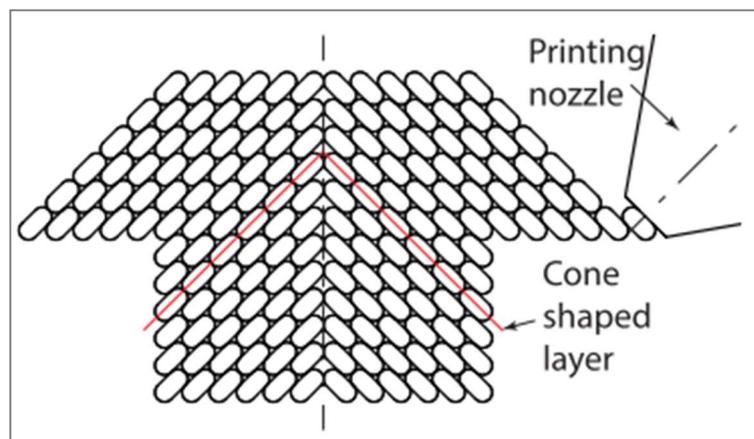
Printing strategy with cone shaped layers. (Wüthrich, Gubser, Elspass & Jaeger 2021, 2)
